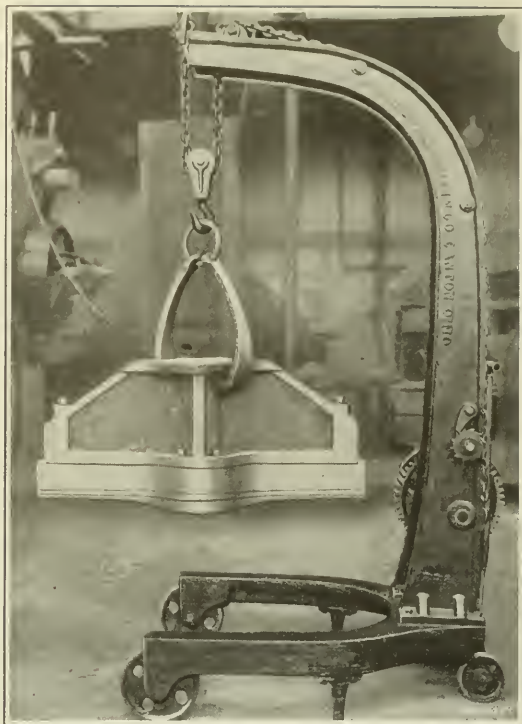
One class of service for which portable cranes are found useful is in handling heavy castings that must be set up on machine tools and removed after completing the operation. For this purpose their chief advantage is the fact that the load may be placed in almost exactly the desired position. The Canton Foundry & Machine Co., Canton, Ohio, is the manufacturer of the portable crane shown in this illustration
